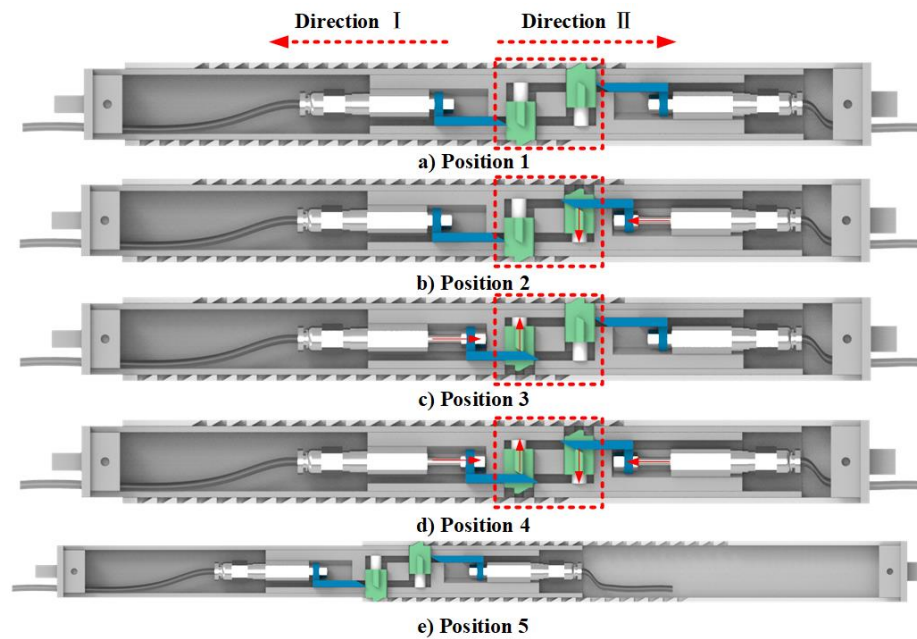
Operation principle of the passive lockable joint. (a) The joint is locked in normal positions. (b) When the locking module B works, the inner pipe is free in Direction II and limited in Direction I. (c) When the locking module A works, the inner pipe is free in Direction I and limited in Direction II. (d) When the locking module A and B work at the same time, the inner pipe is free in Direction I and II. (e) The extreme working position of the lockable joint is shown in Fig. 2(e).
